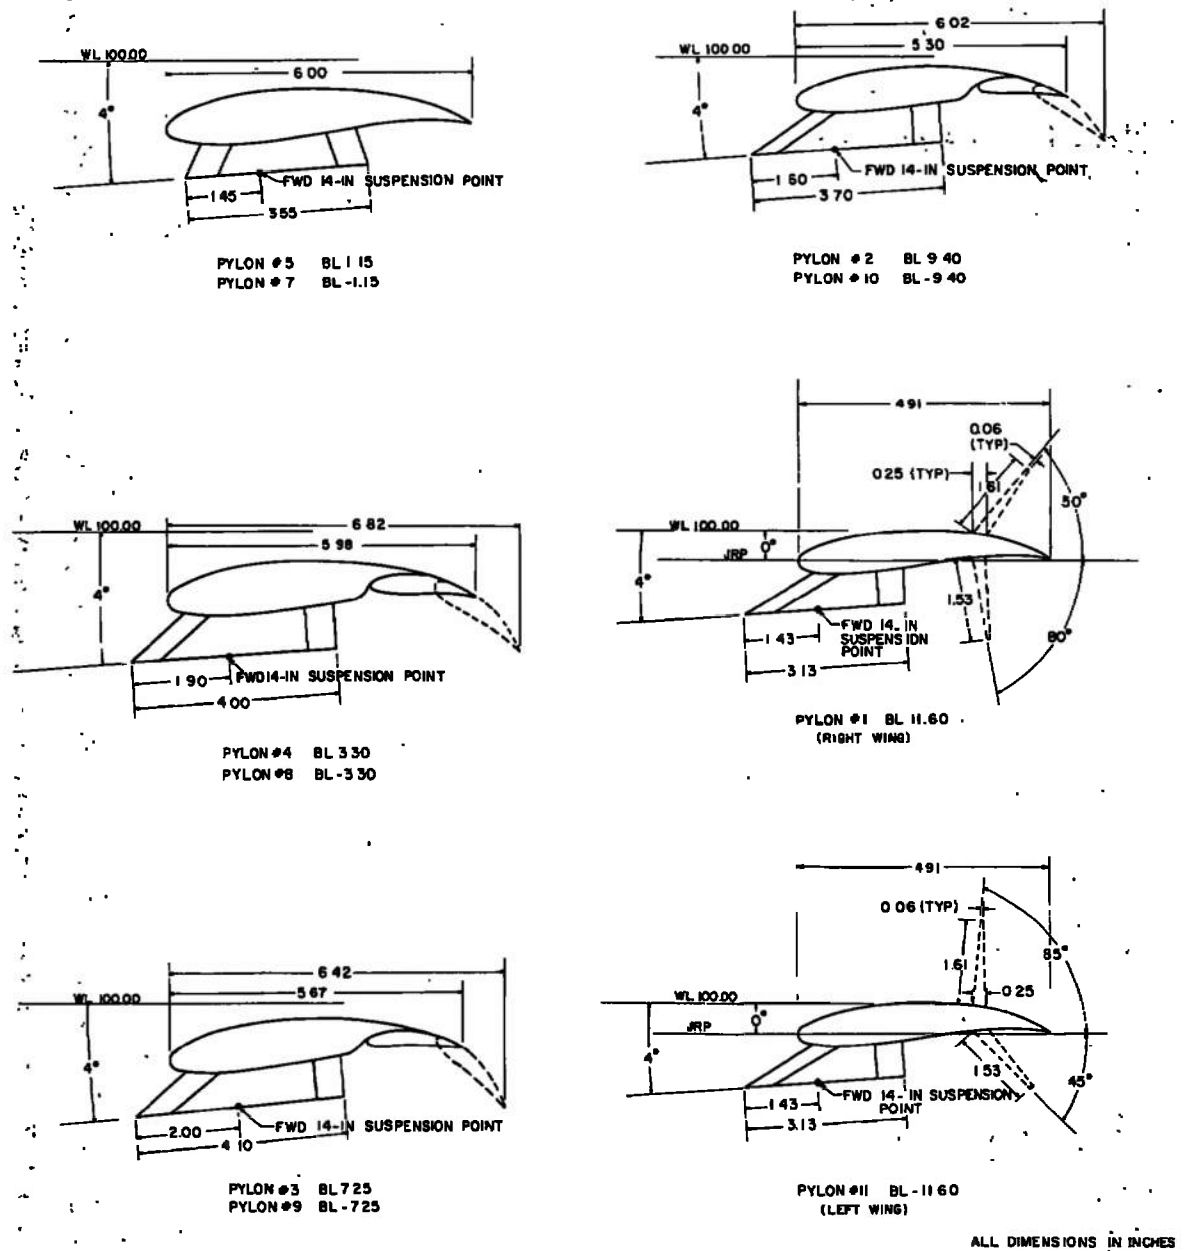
Dimensional Sketch of the A-10A Wing Pylons
